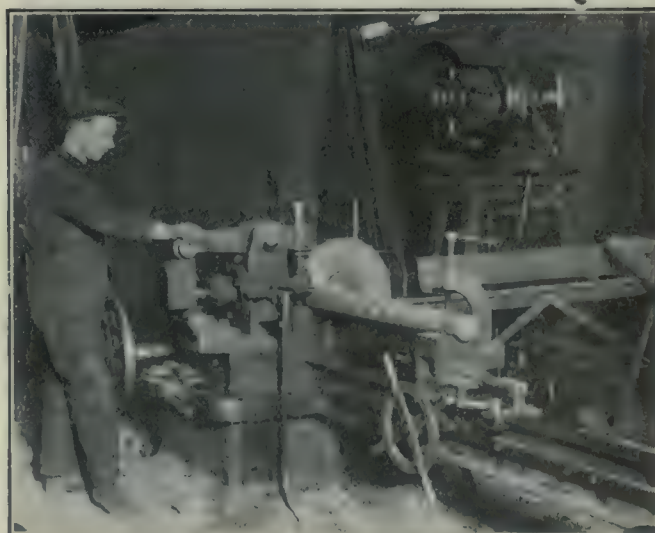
FIG. B—NEWTON SAW SHOWING MOTOR AND STEEL BAR FEED MECHANISM.
